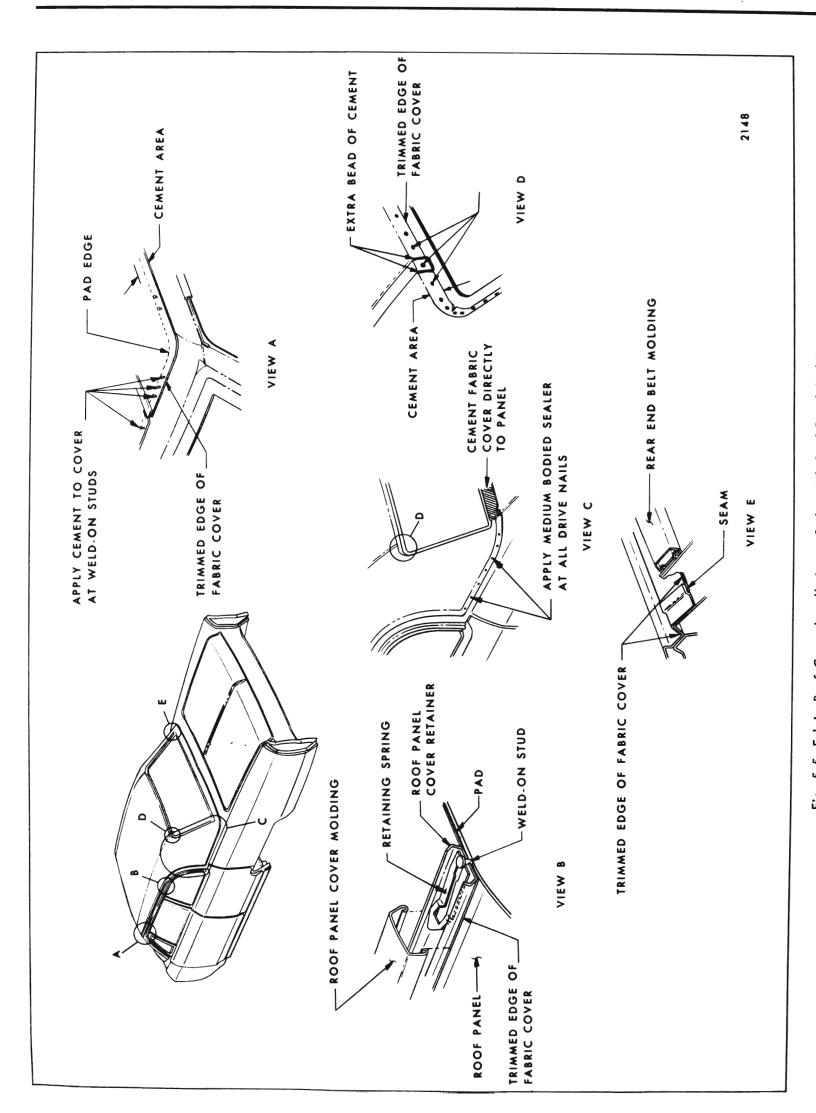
Fabric Roof Cover Installation – Styles with Roof Panel Moldings
